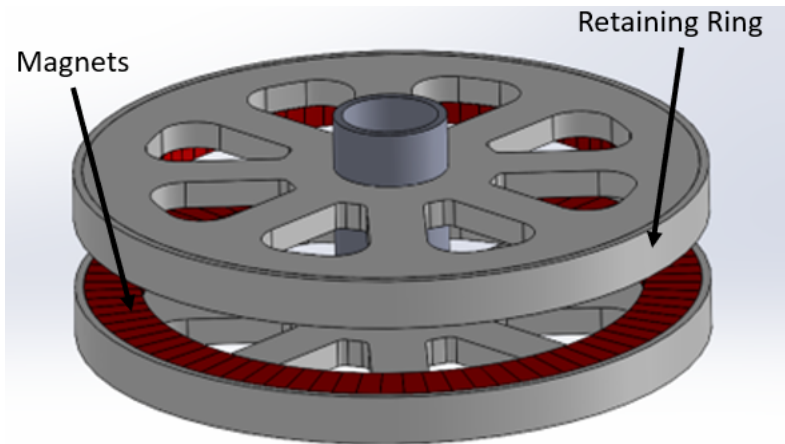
Isometric view of cutout disk rotor with magnets in red
